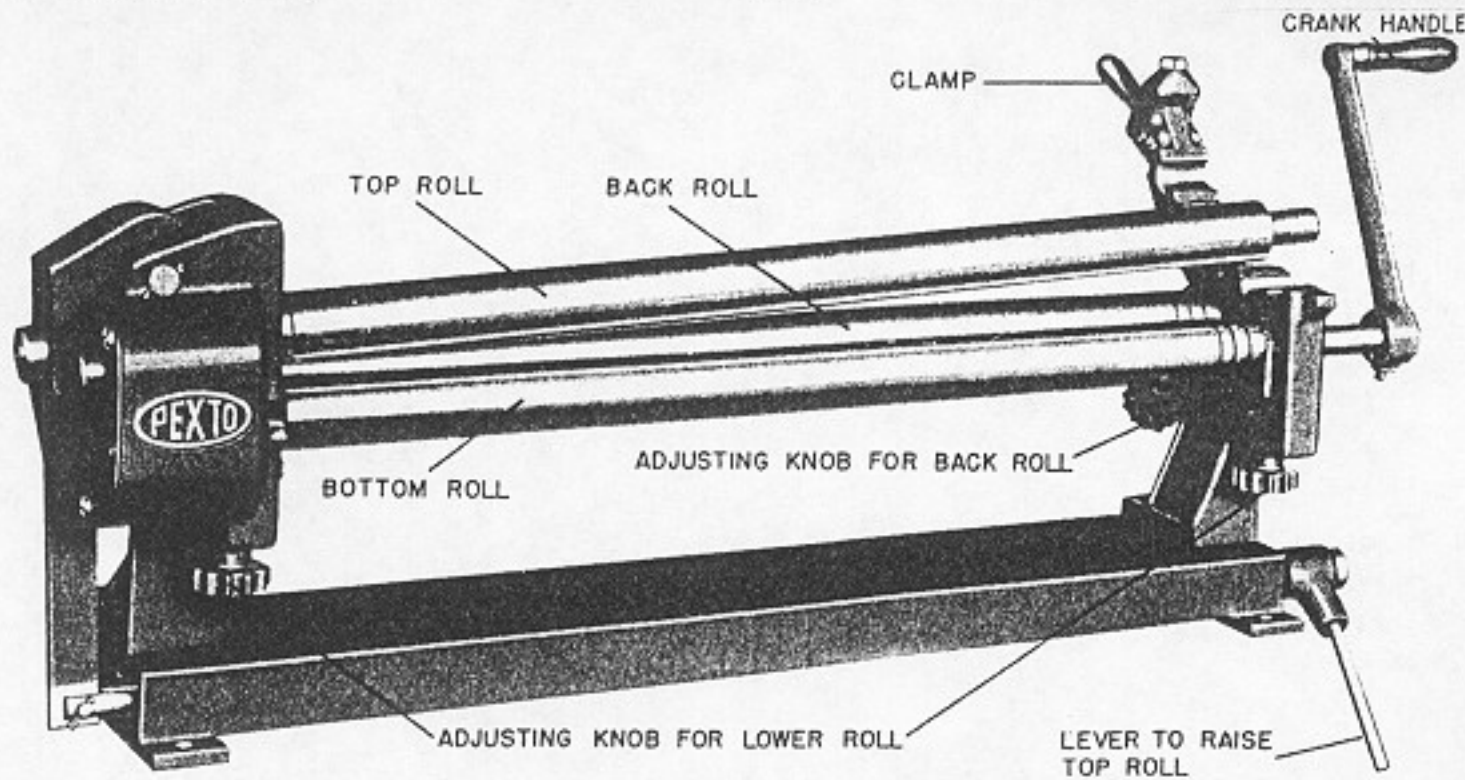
Forming Rolls. (Courtesy Peck, Stow and Wilcox Co.)
